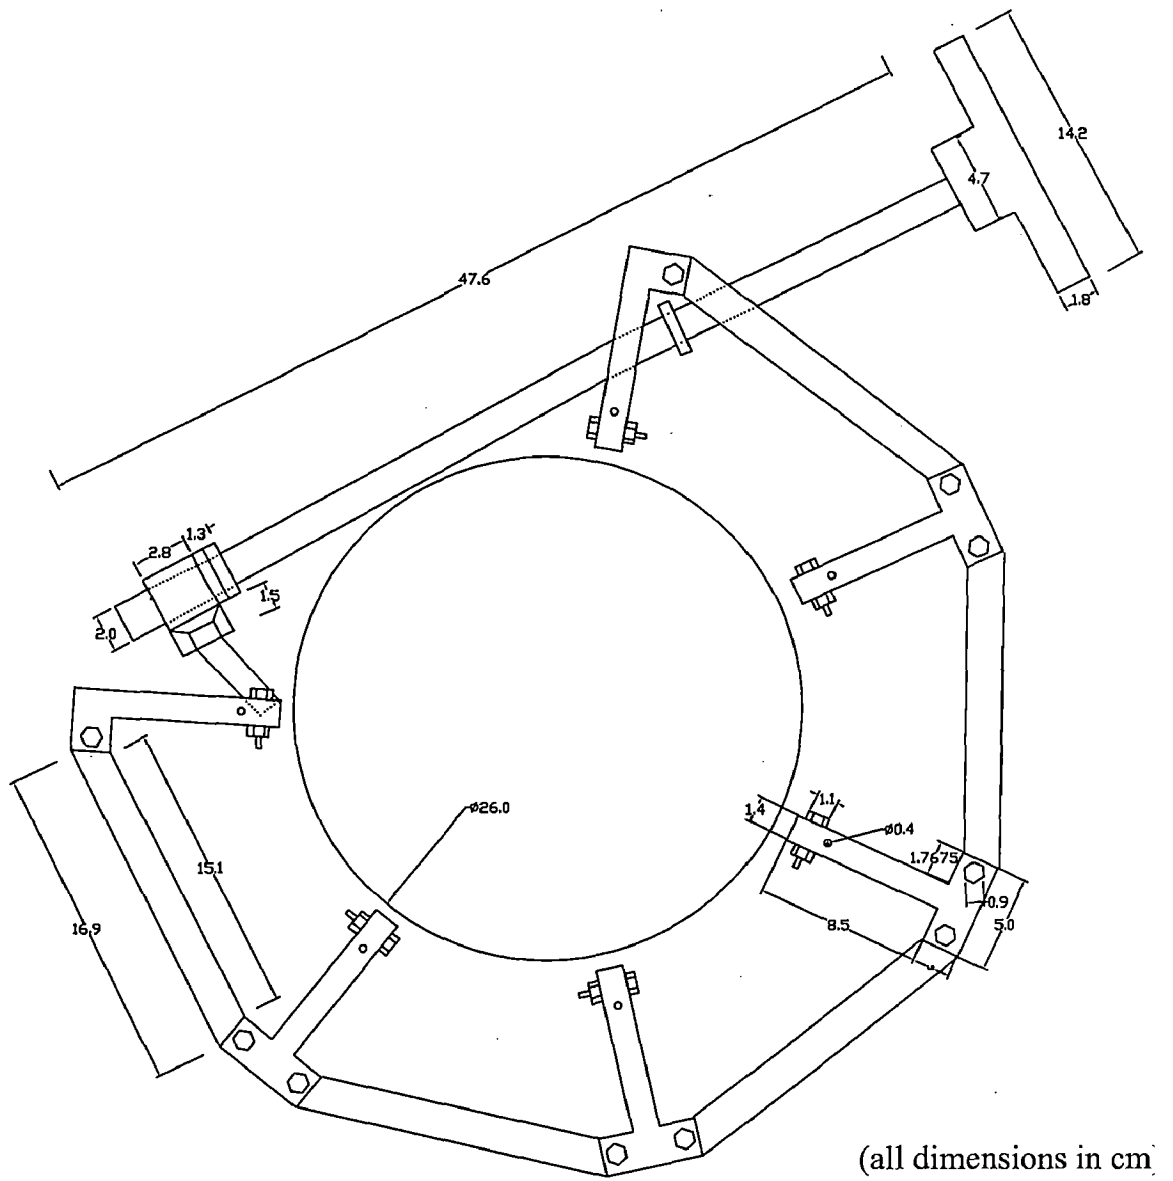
Drawing of Guide Vane Regulating Mechanism .
